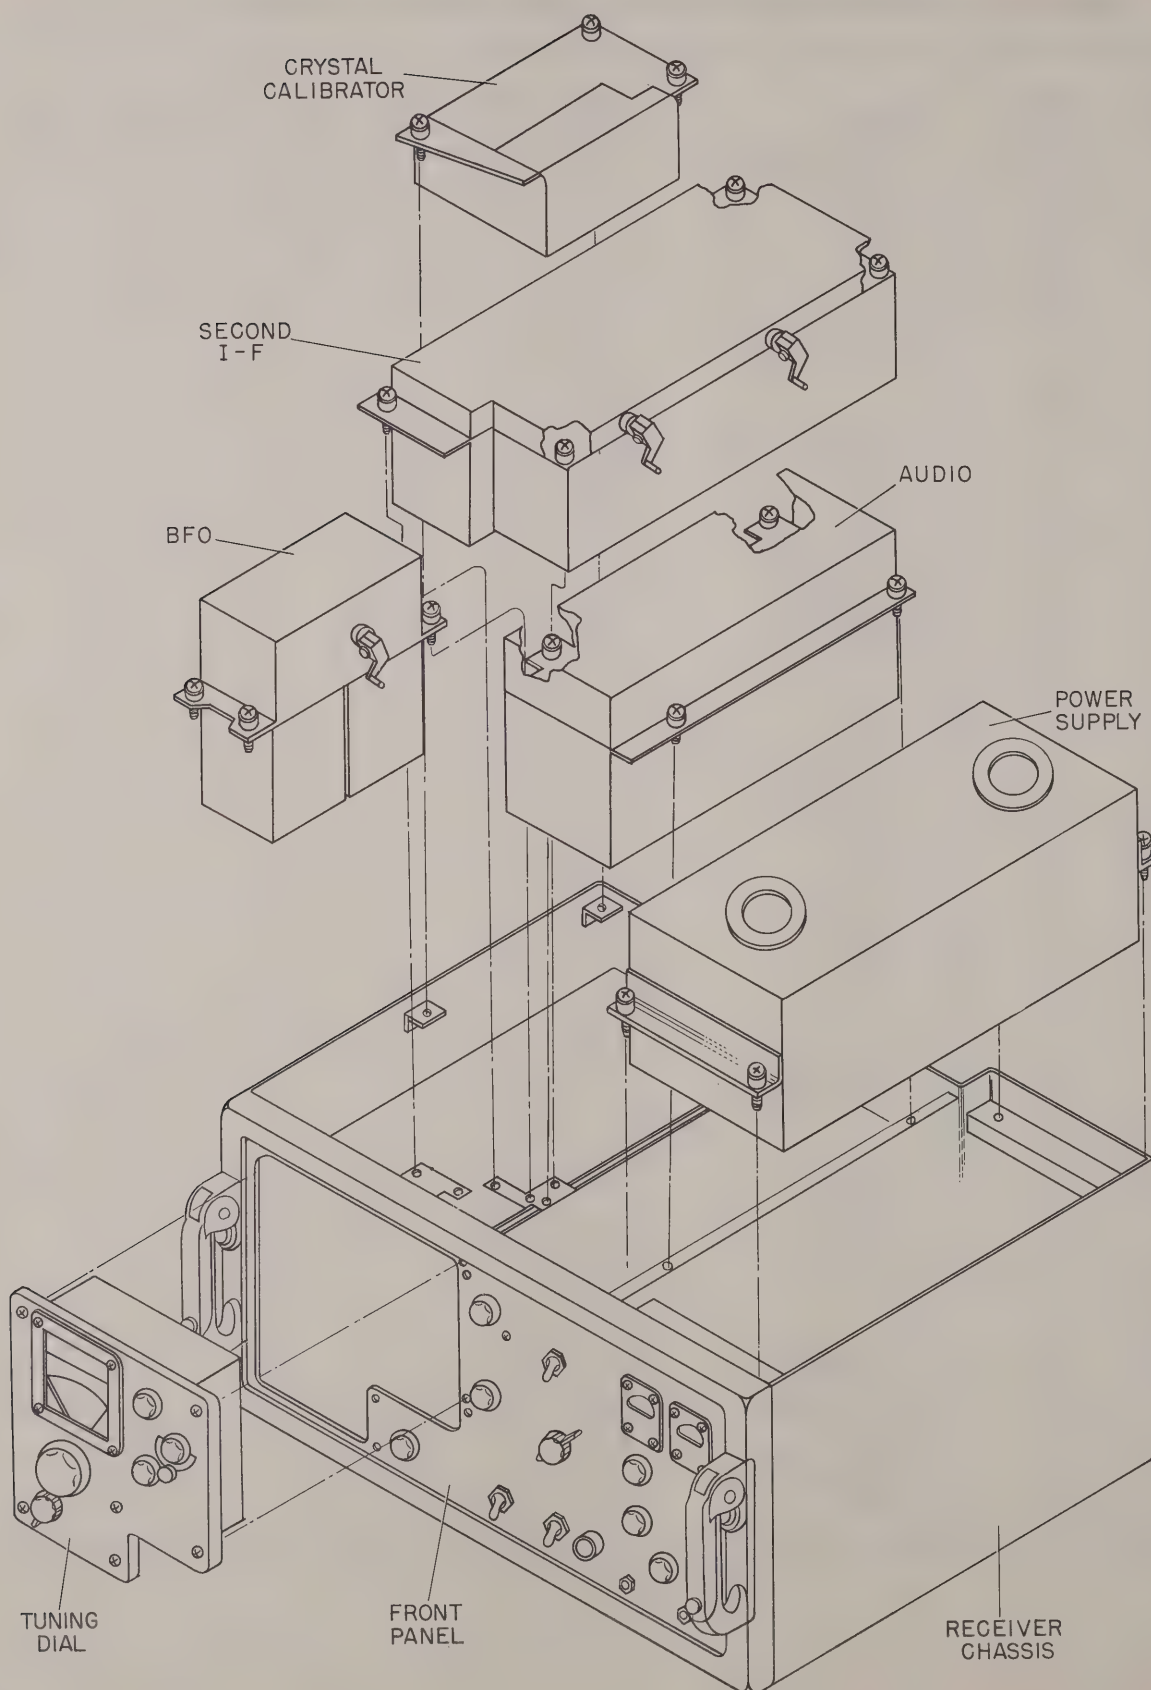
Removing and Replacing Assemblies on Top Side of Chassis
